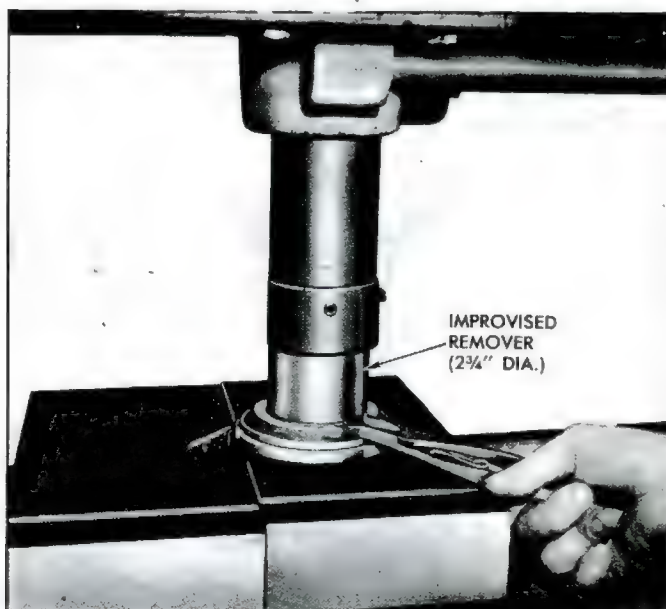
B-12—Pressing Rear Bearing from Bearing Retainer
